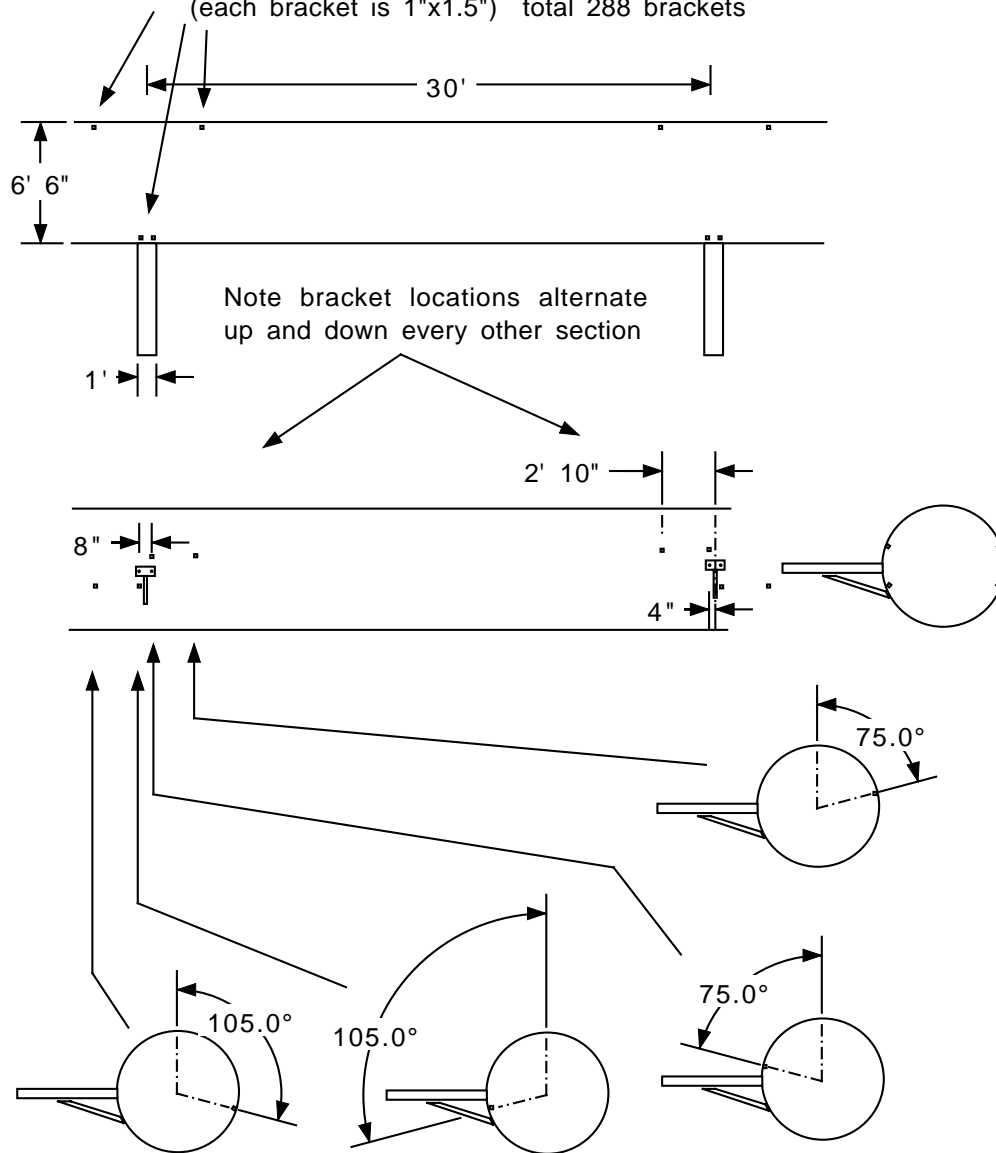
Locations for welding spring brackets inside decay pipe.
